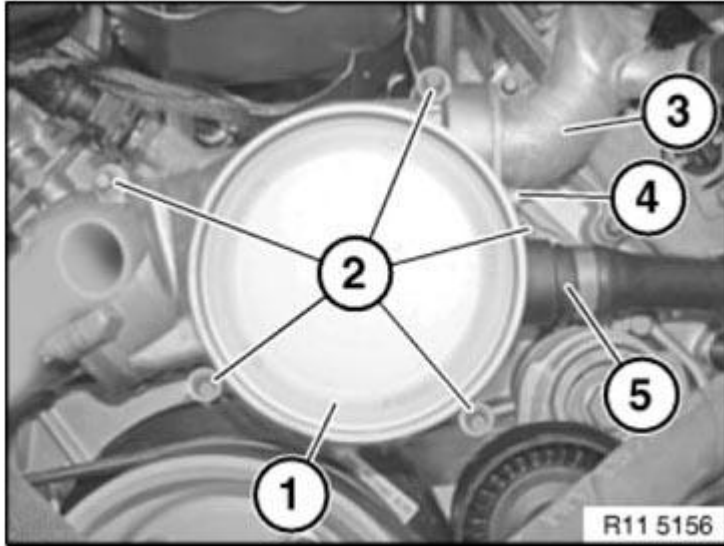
Identifying Pipe, Screws And Coolant Hose
